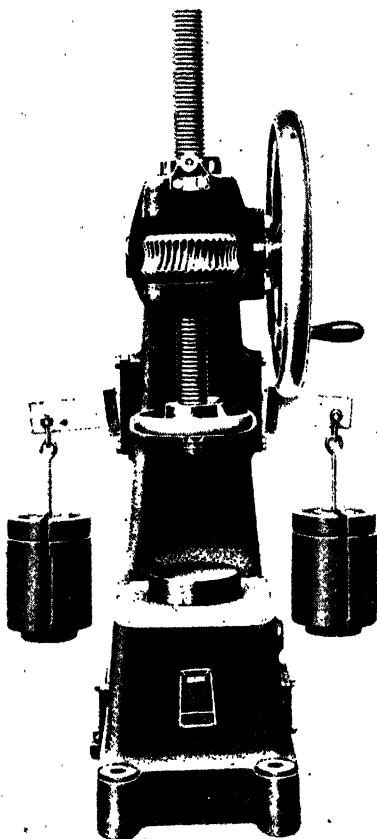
BRINELL HARDNESS-TESTING MACHINE. (*Avery.*)
